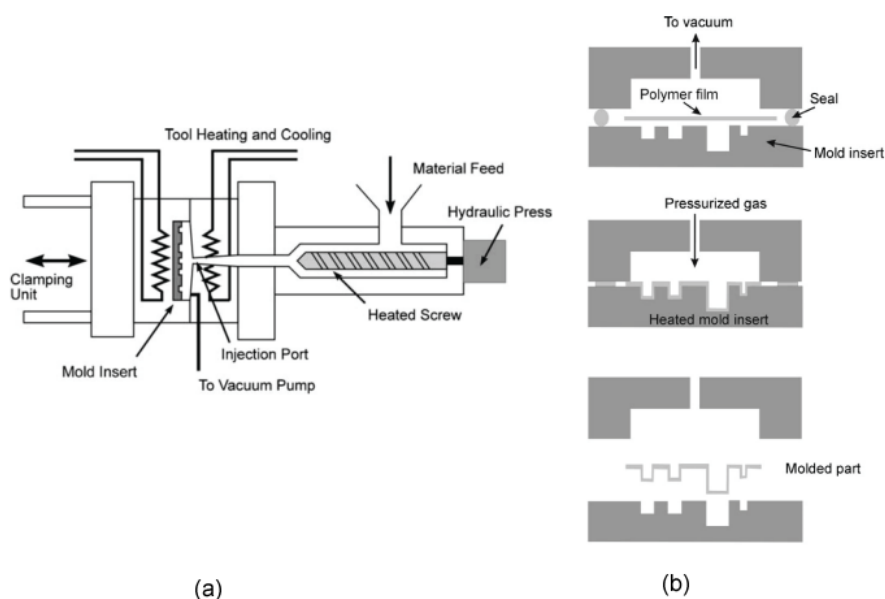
(a) Cross-sectional view of an injection molding machine<sup>90</sup>. (b) Diagram of the micro thermoforming process<sup>85</sup>.
